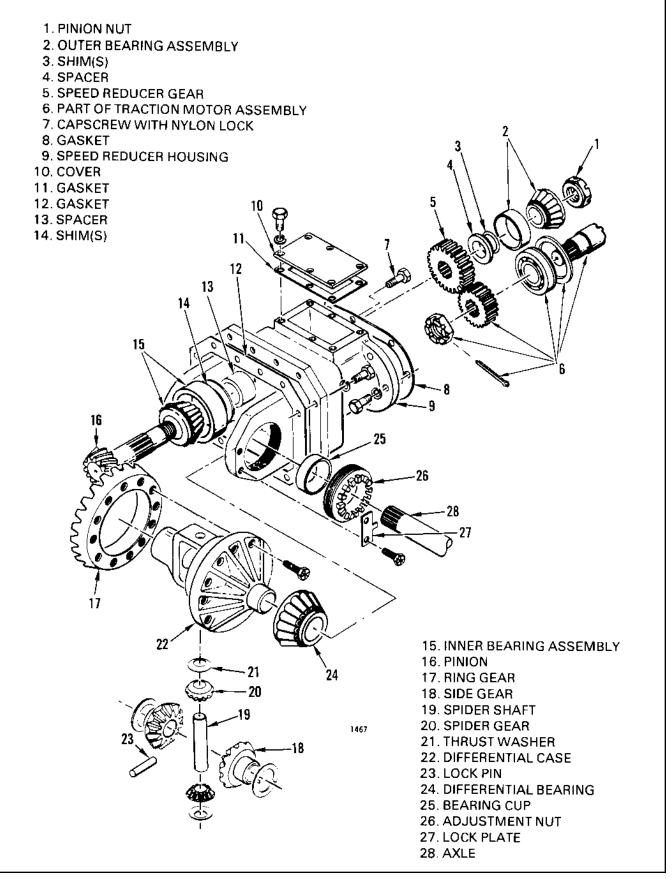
SPEED REDUCER AND DIFFERENTIAL ASSEMBLY
